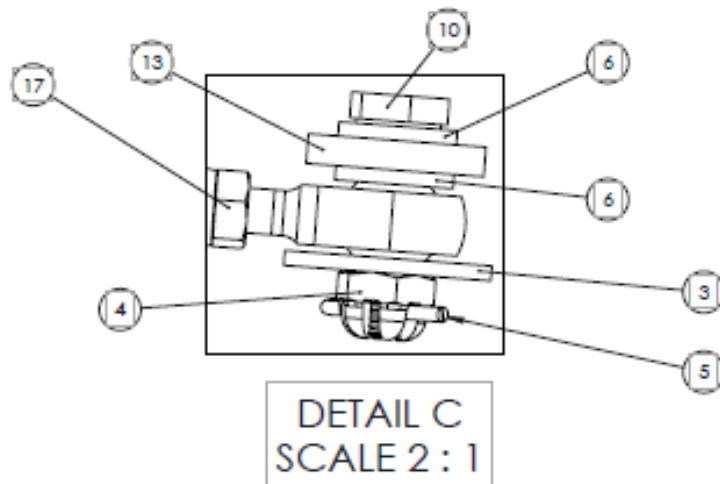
PUSH PULL TUBE ATTACHMENT - AILERON BELLCRANK
